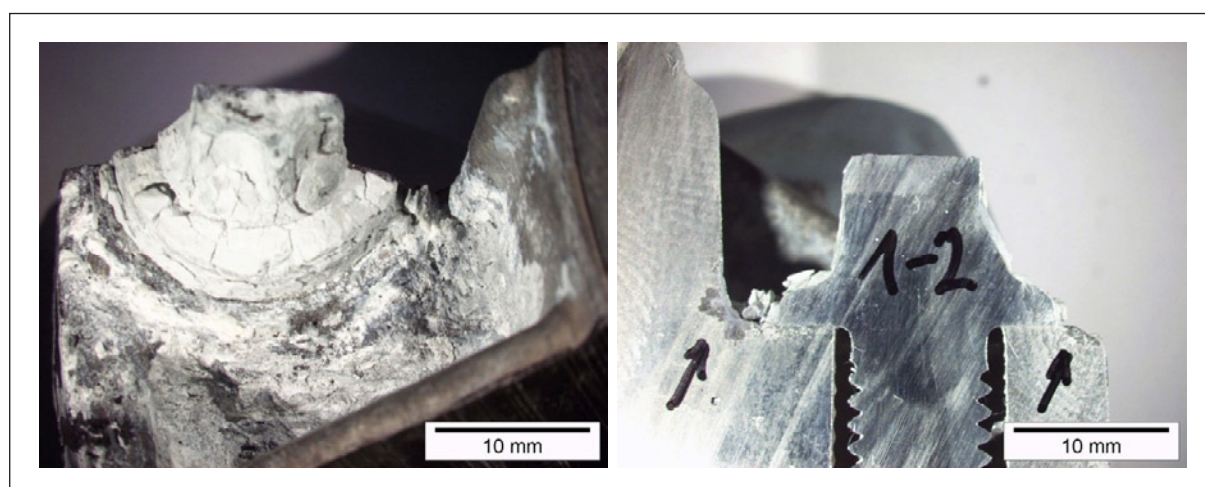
Side view and longitudinal cut of M8 EN AW 7075 after 720 hours of salt spray test
